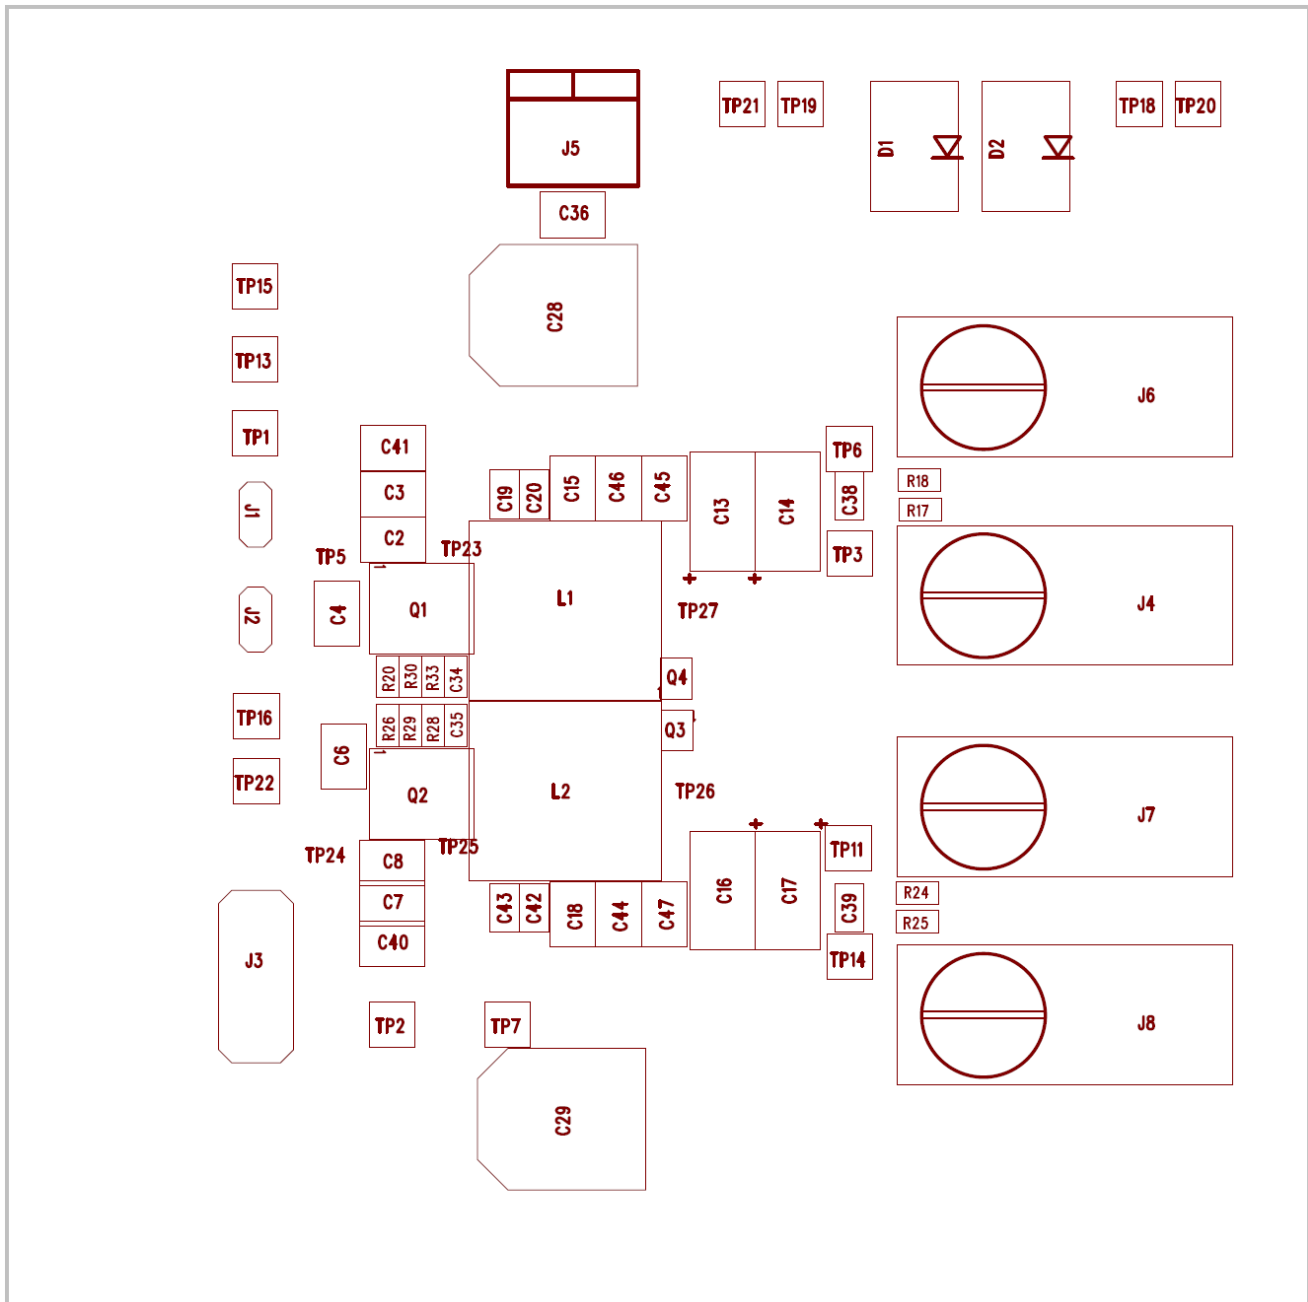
PWR091 EVM Top Layer Assembly Drawing (Top View)
